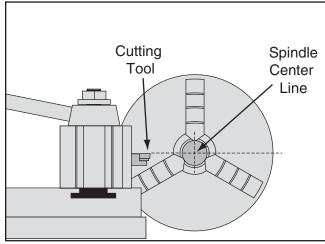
Cutting tool aligned with spindle centerline (viewed from tailstock).
